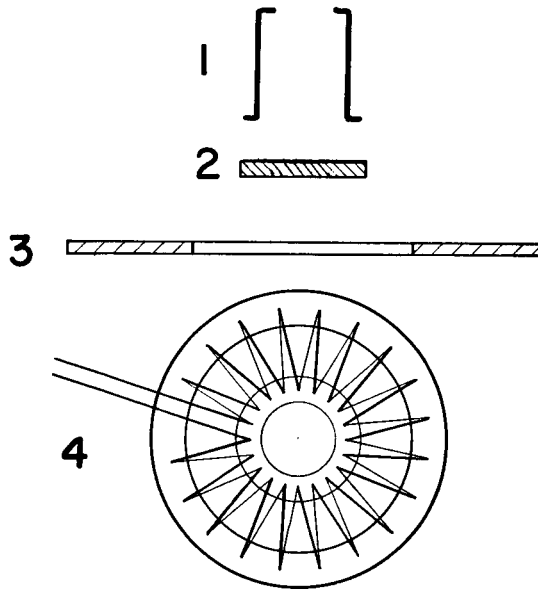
Exploded view of the receiver assembly. 1 - upper cavity, 2 - receiver disk, 3 - thermopile cold junction support, 4 - thermopile (rotated through 90° for better view).
